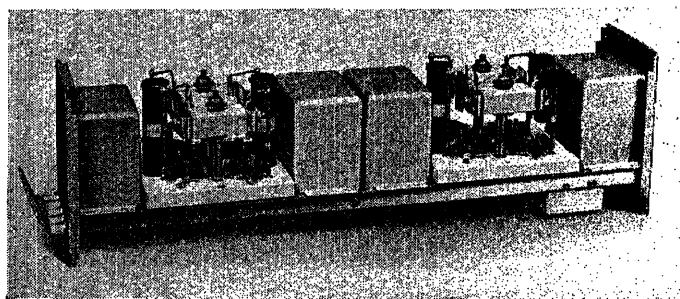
The filter parts are assembled and wired on a chassis which is slid as a unit inside the filter container
